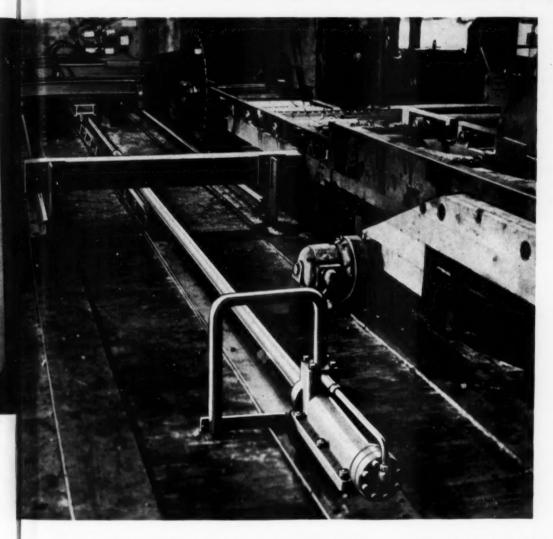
Long-travel hydraulic cylinder used for a sawmill table drive carries maximum work load under tension, returns unloaded in compression. Photo, courtesy Oilgear Co.
